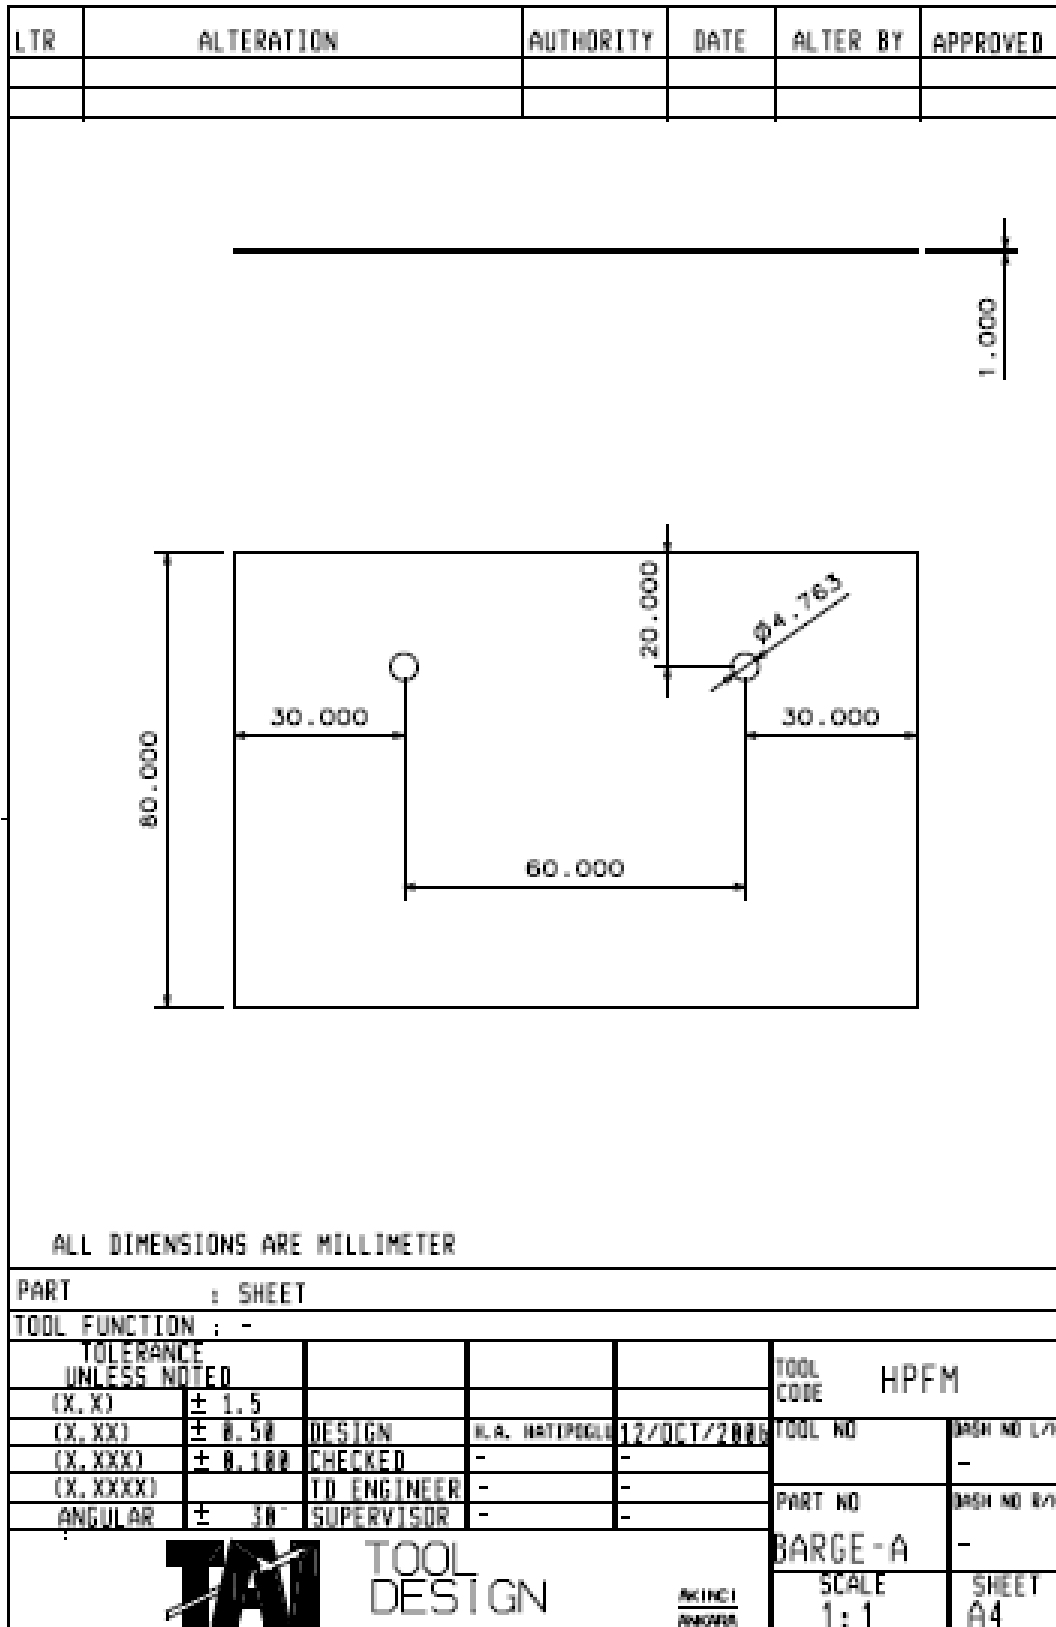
Technical drawing of the blank used in the straight flanging and contoured flanging experiment.
